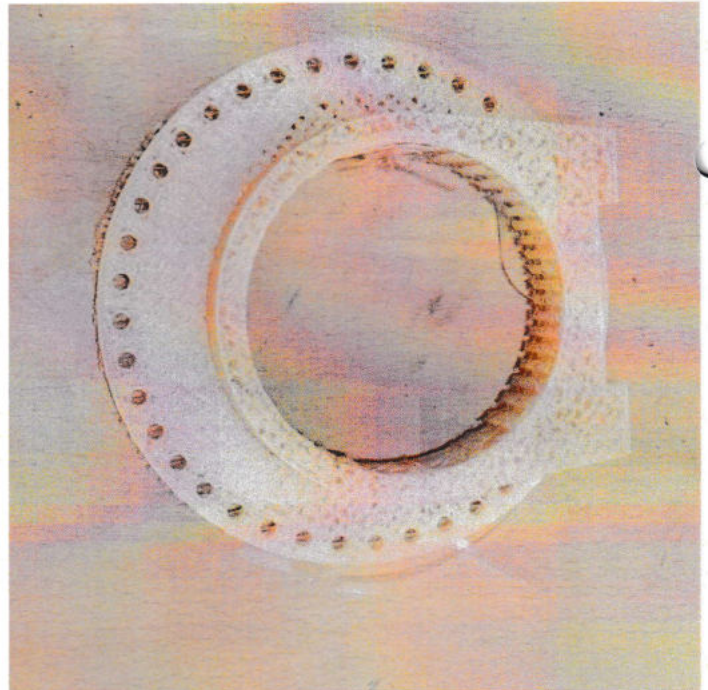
D Printing Eccentric Housing Plate Team Brahmastra Quad
